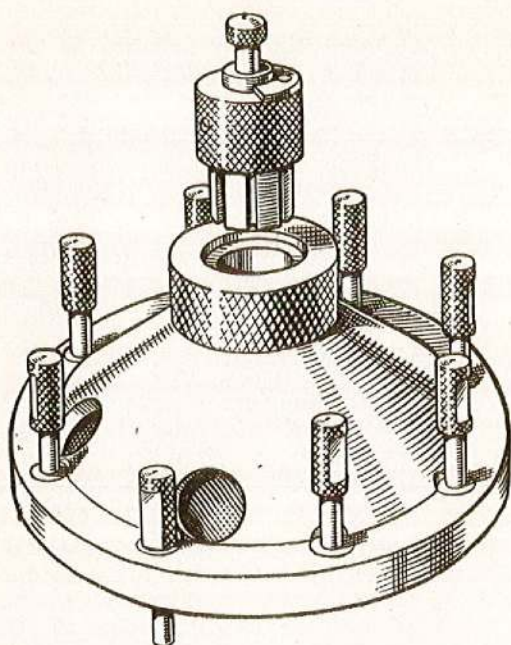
Concentricity and depth gauge for pump housing and quill shaft
